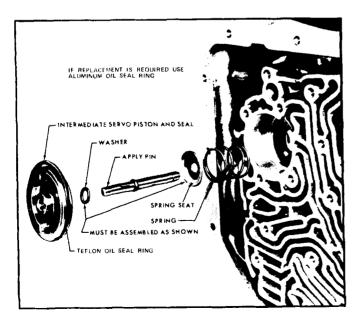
G-157 Exploded View of Intermediate Servo Piston and Pin
